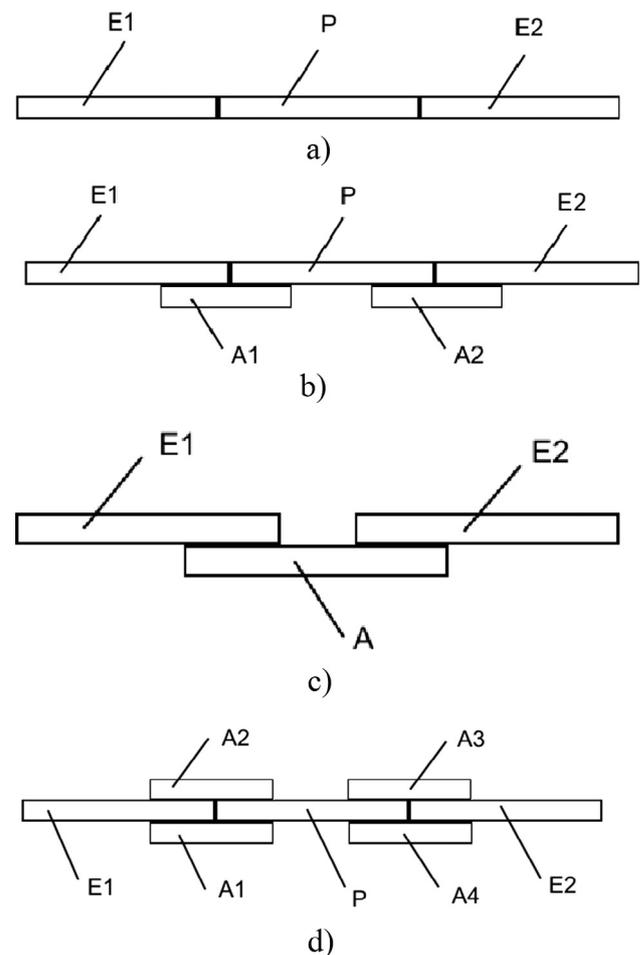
Tensile test specimen configuration for (a) butt joint welding; (b) unilateral lap joint welding (type 1); (c) unilateral lap joint welding (type 2) and (d) bilateral strap joint welding.
